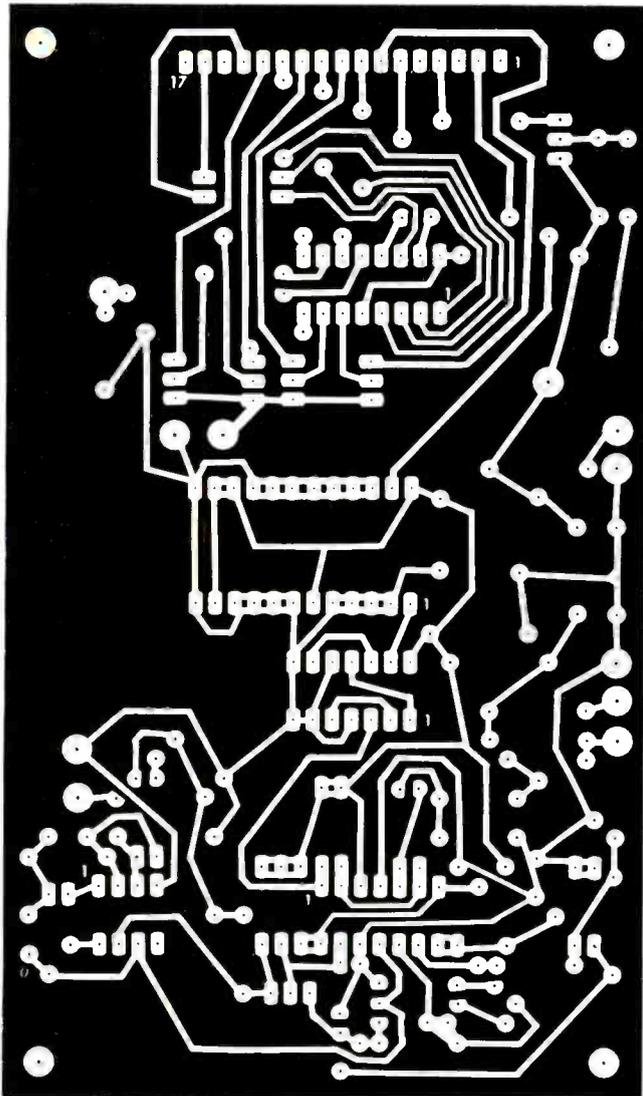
Actual-size etching and drilling guide for the printed circuit board is above left, component layout at right.
